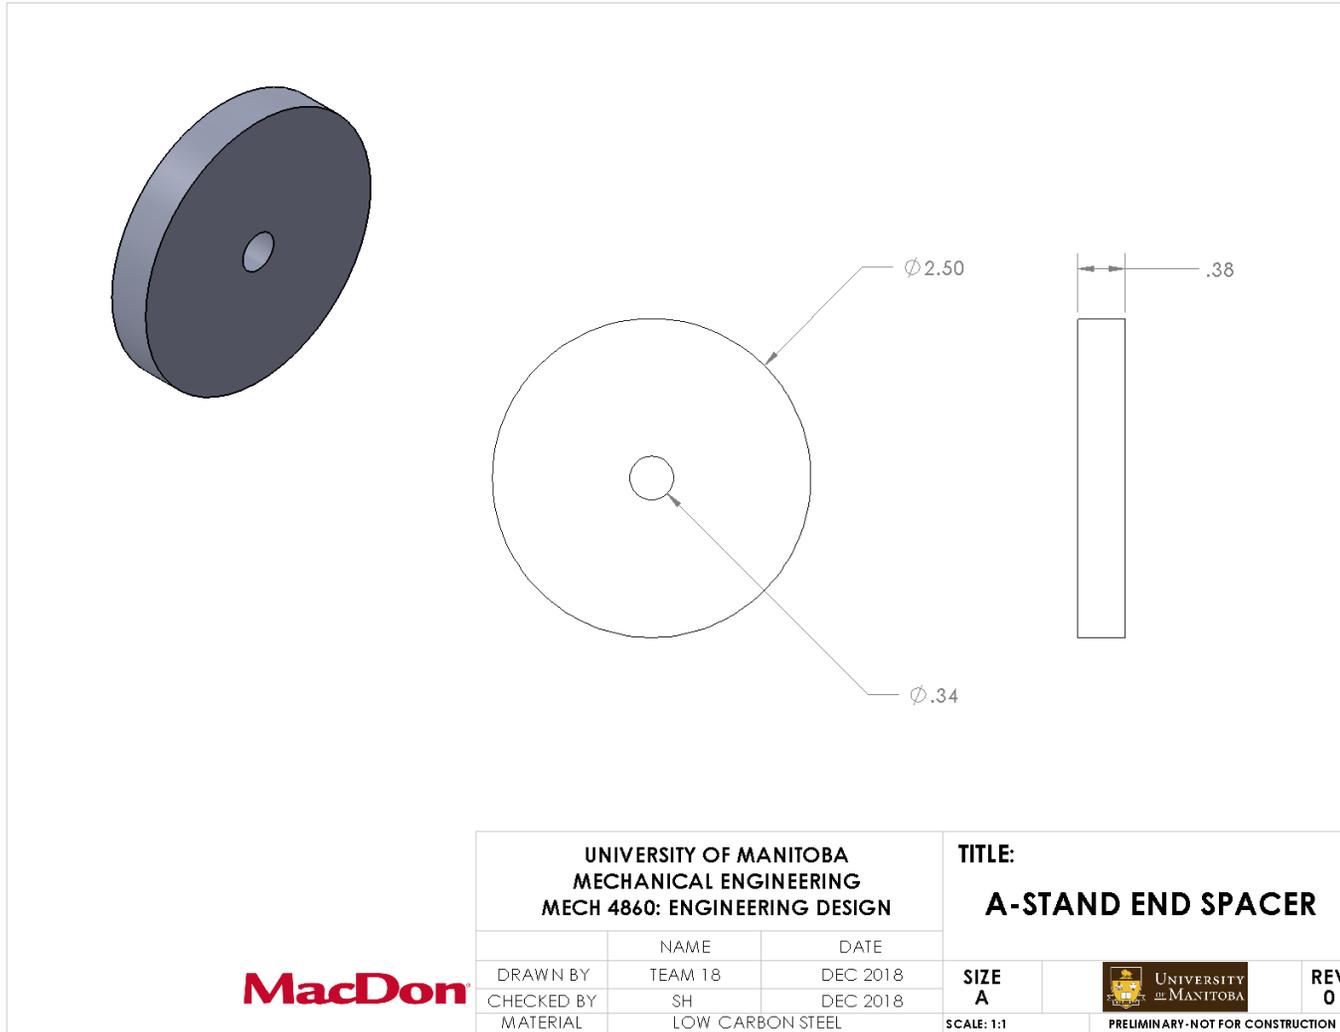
Preliminary Drawing for the A-Stand End Spacer
